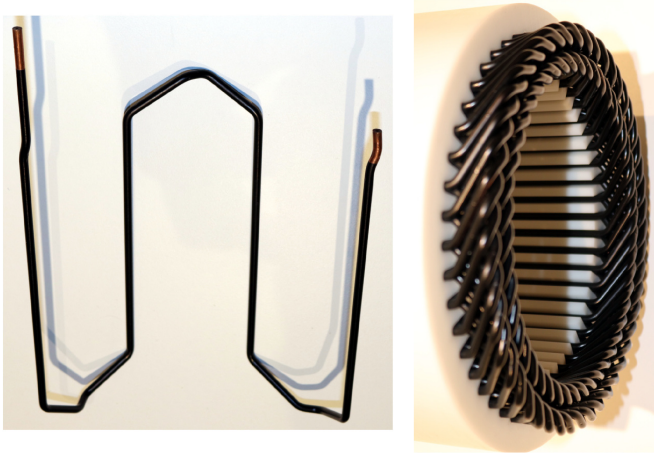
The W-shaped coil prototype to the left and the end-winding assembly to the right.
